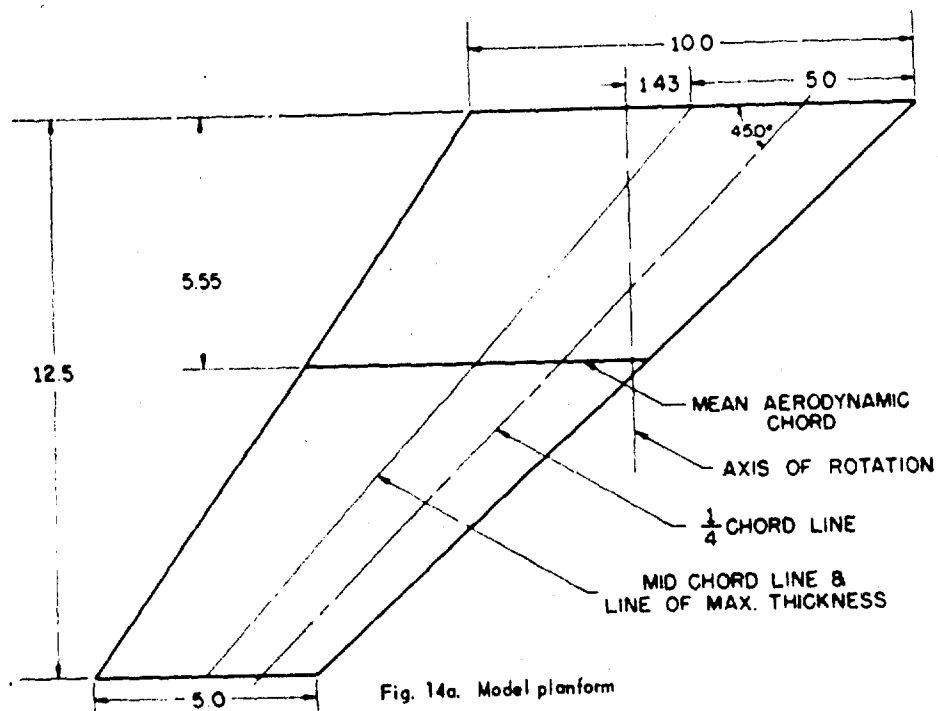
Swept stabilizer design drawings (all dimensions in inches).
